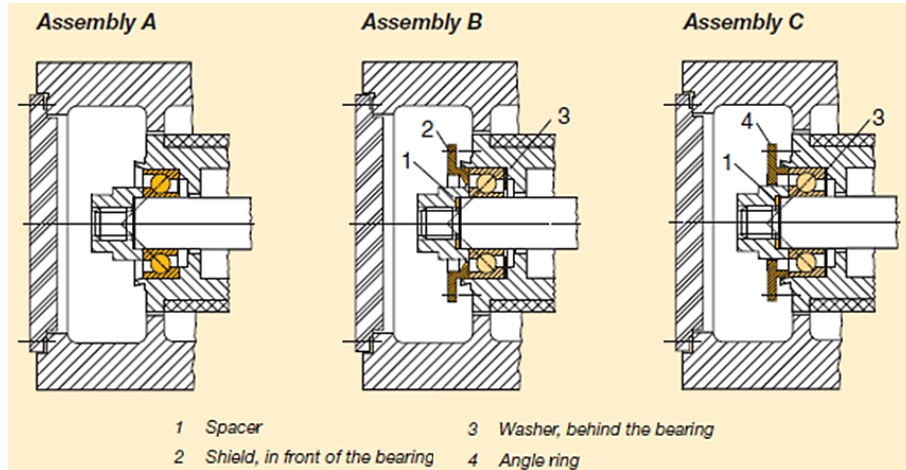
Assembly A, B and C of the FE9 test rig. Assembly A comply with the standardized testing procedure of DIN 51821-2. Adapted from [130].
